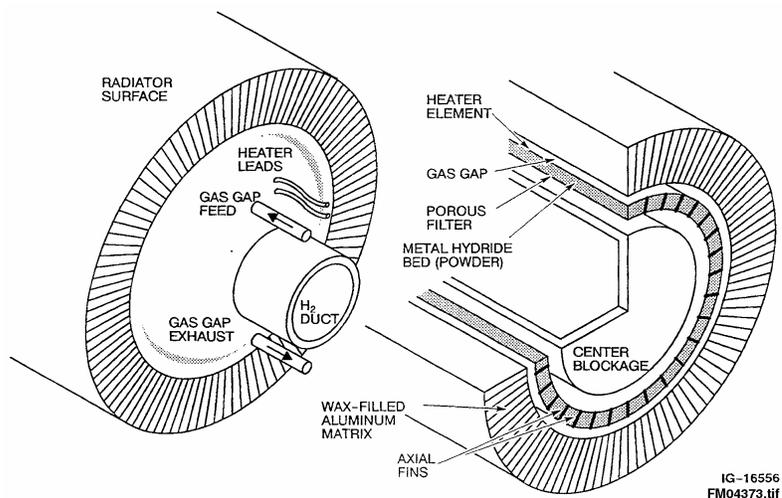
High-pressure Metal Hydride Bed, Isometric View
